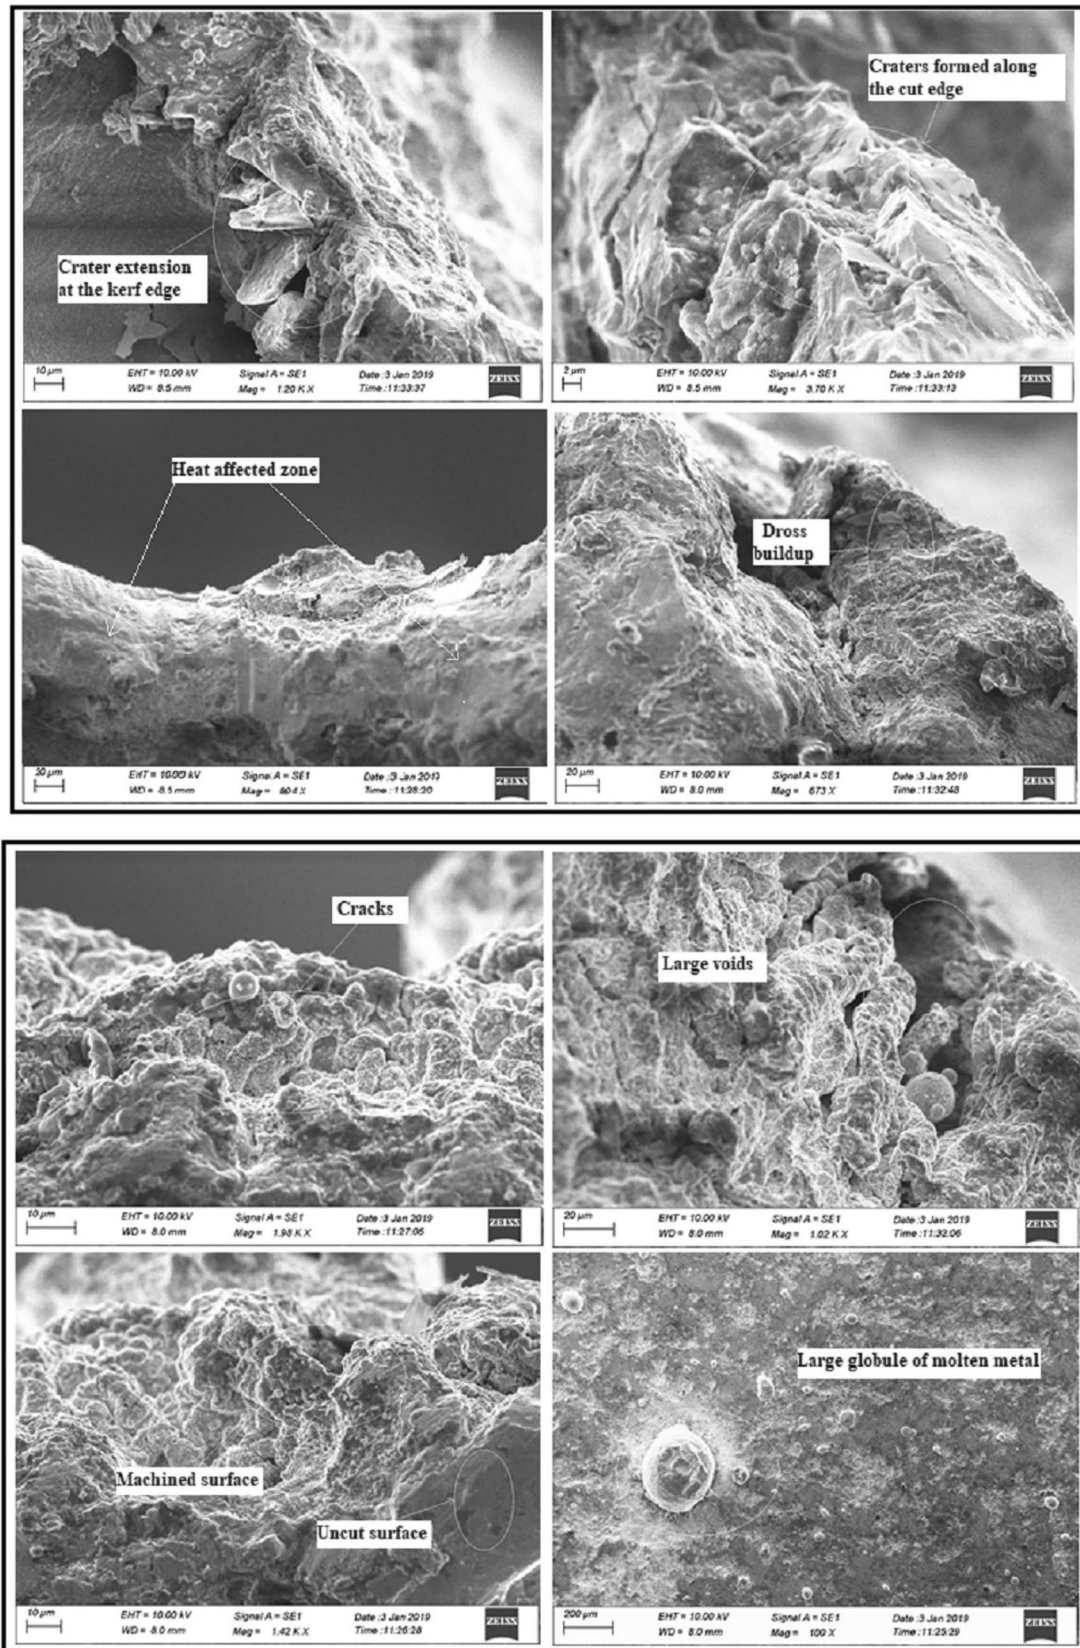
SEM morphology of SS 304 alloy machined using nozzle 2
